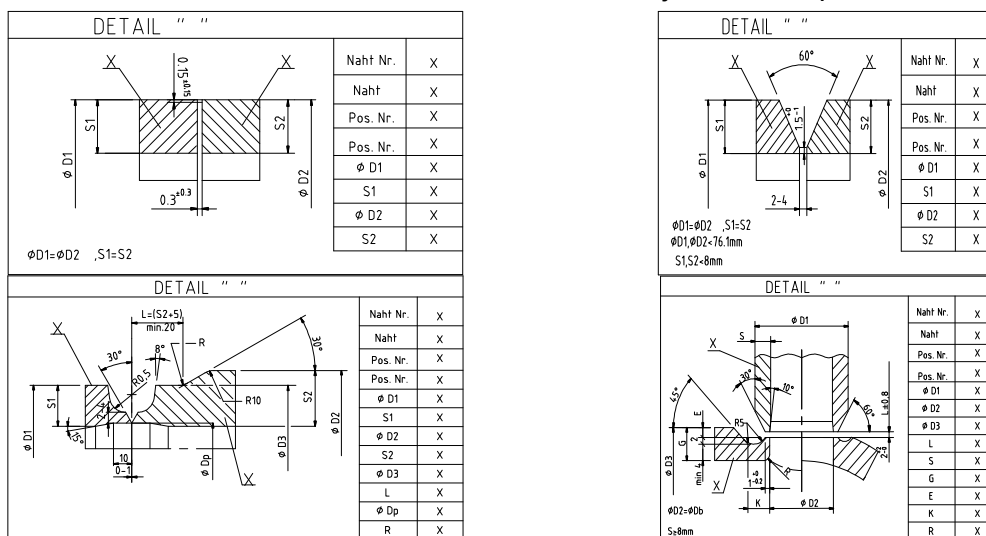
Groove forms in case of butt welding and nozzles welding
